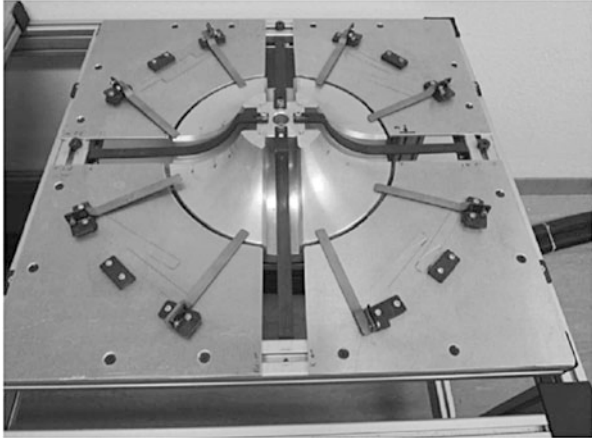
Production tool with grooves for the proper execution of stitch formation, example: rotor demonstrator II by DFG-FOR 278 [6]
